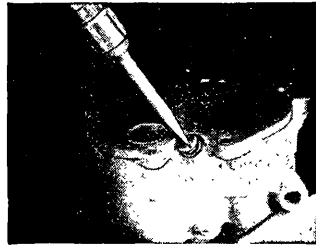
Install pump discharge jet and plug. Be sure jet is clear of all restrictions and seats properly. Use new copper gasket
